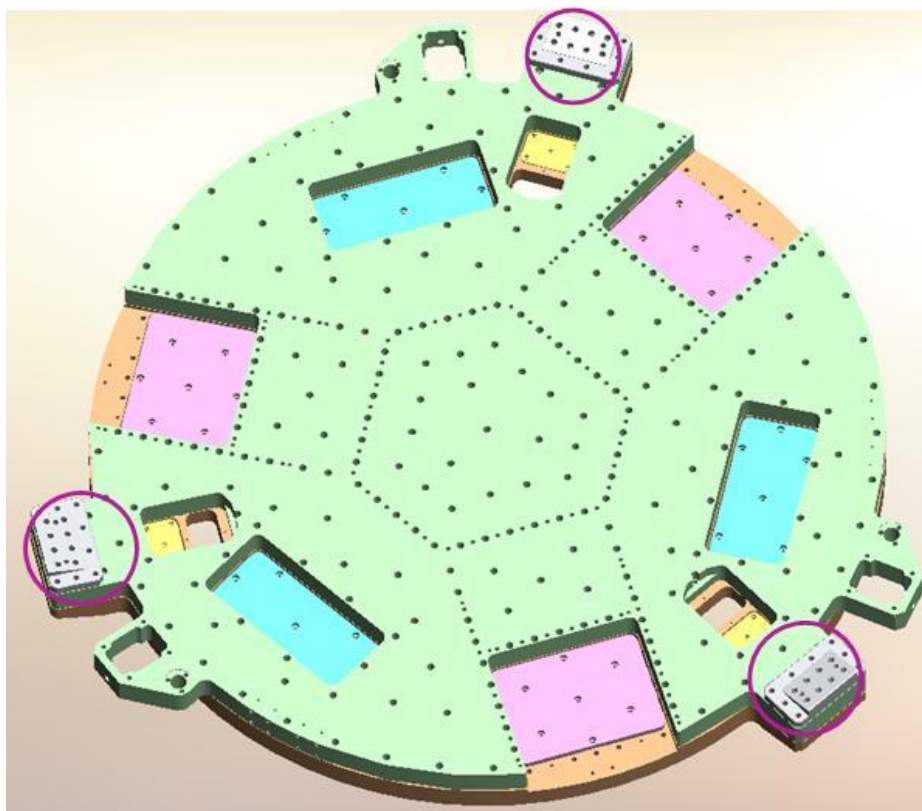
Stage 2 Spring Base Location on D0901517 Cut Out Optical Table
